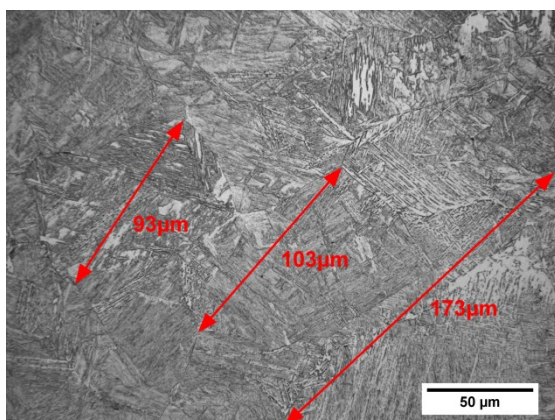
TIG welded sample 3.5.2-4. Maximum diameter of grain is 173 µm.
